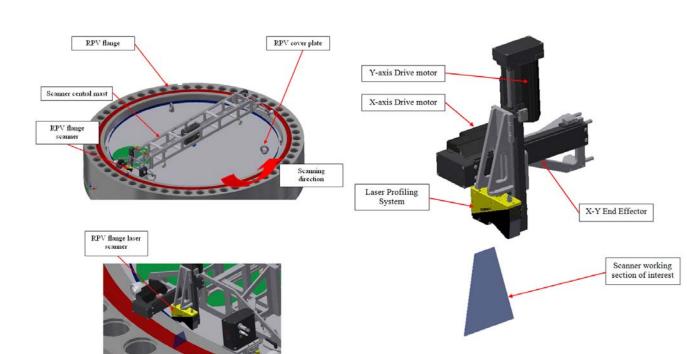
Manipulator for reactor pressure vessel sealing surfaces
